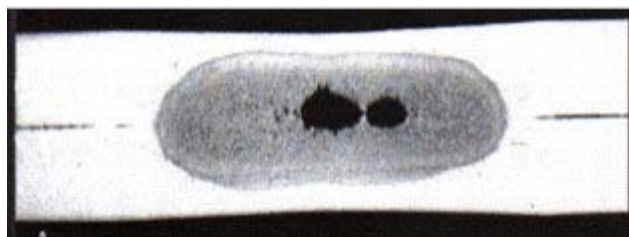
Cross section of a spot weld joining steel plates. Two inclusions in the weld nugget are clearly visible.
